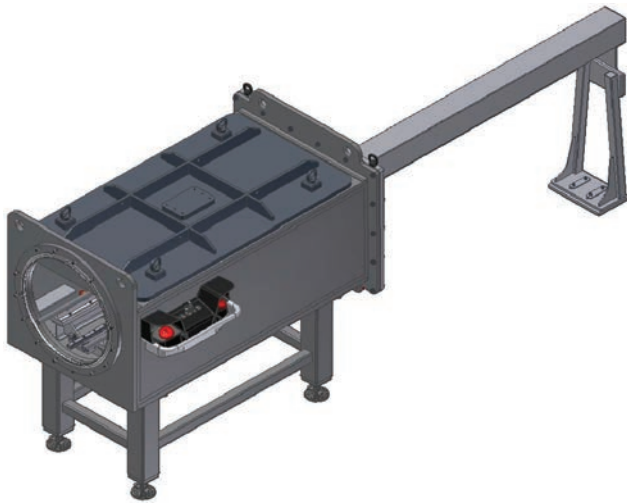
An example of design of auxiliary chamber module for high-productive welding machine
